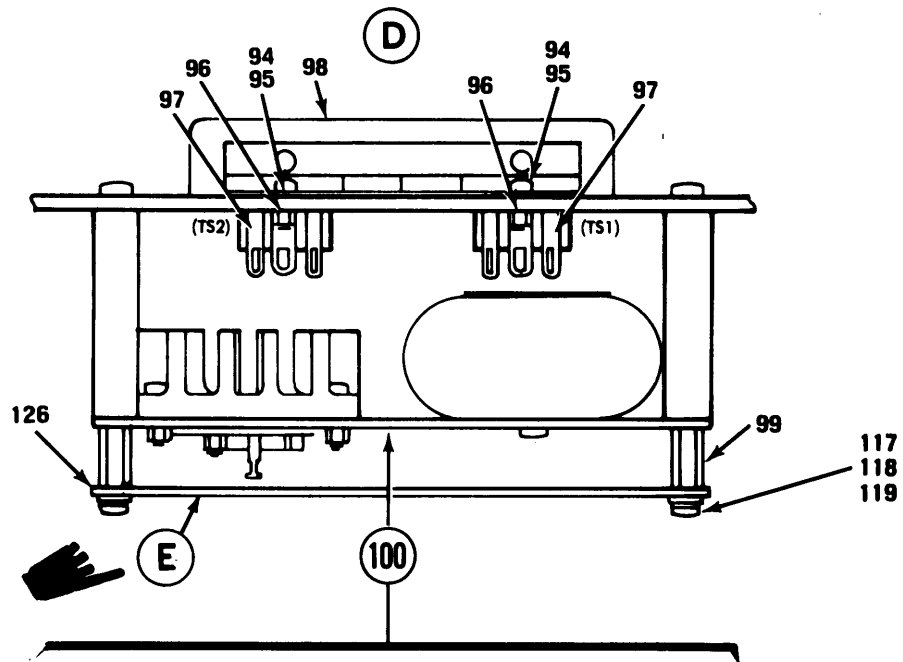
Case and Front Panel Assembly (Sheet 3 of 4)
